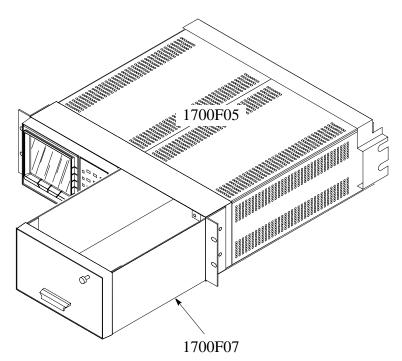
A 1700F05 side-by-side rack mounting cabinet with an instrument and a 1700F07 utility drawer.
